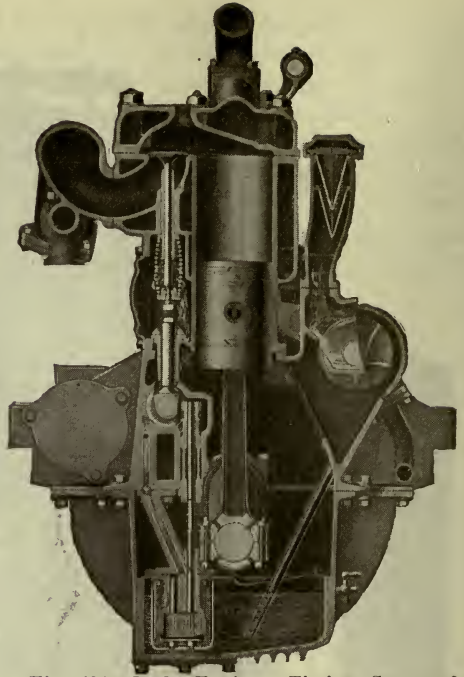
Buda Engine. Timing Gear end view of the Full Force Feed oiling system. Note the operation of the Geared oil pump and the saber type of oil gauge. Note parts lubricated by splash.
